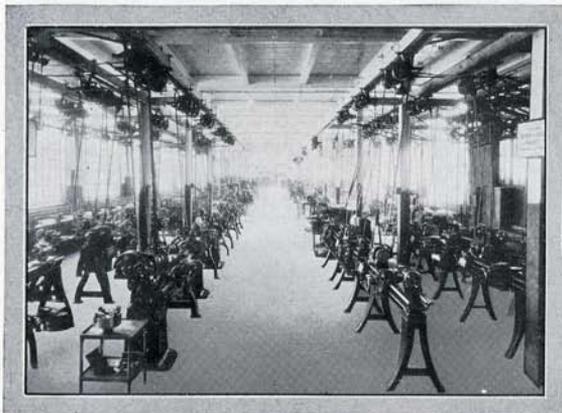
Montreal Technical School, Montreal, Quebec, Canada. Montreal School Shops are using 22 South Bend Lathes.
